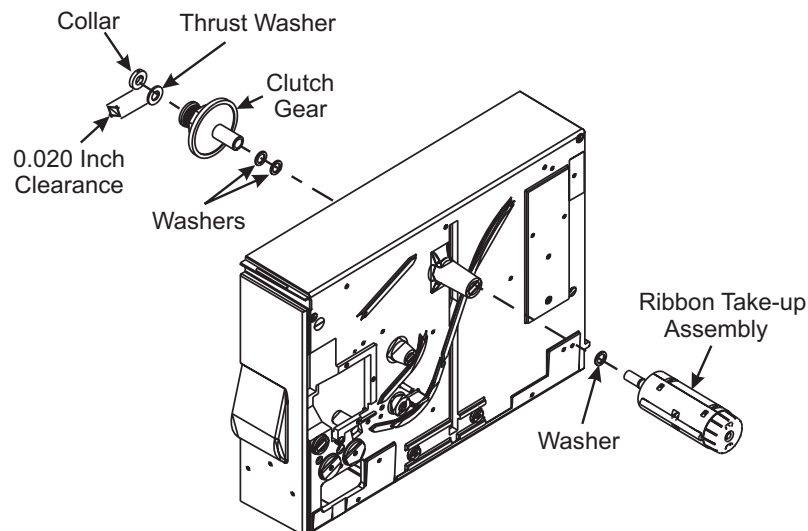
Ribbon Take-Up Assembly/Disassembly
